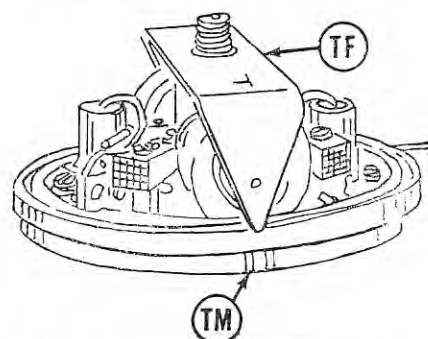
Timing fixture (TF) installed and aligned with armature plate timing marks (TM) for adjusting points for upper cylinder. Refer to text.
